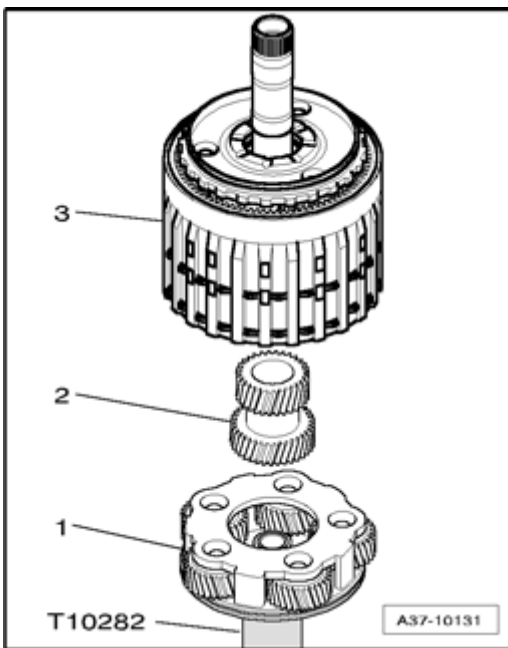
Planetary Carrier "I", Planetary Drive "I" + "II" And Sun Gear
